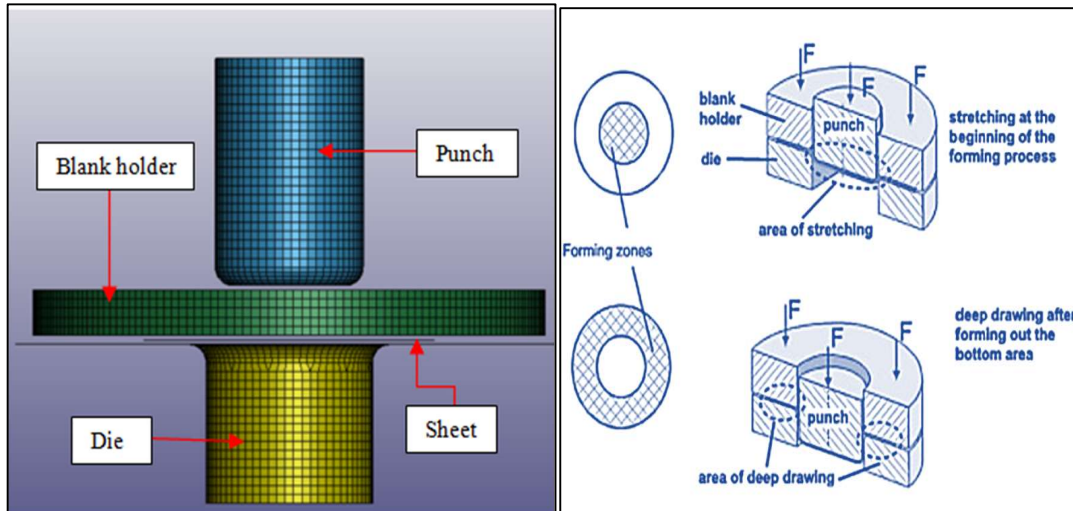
a) Deep-drawing parts b) Forming zones and forming areas in the deep-drawing process [12]
